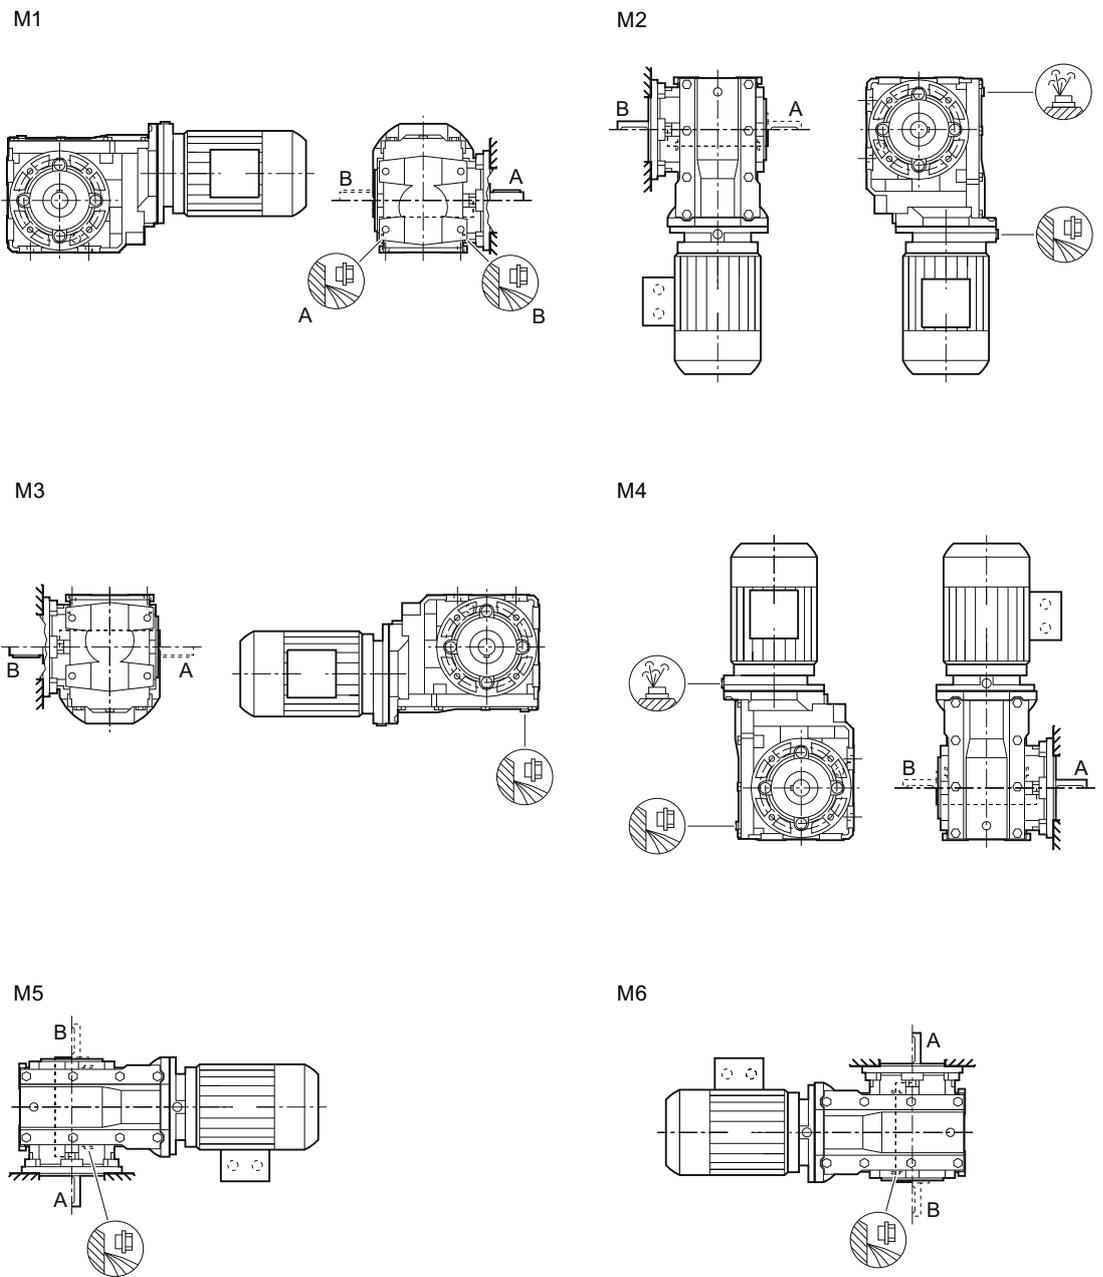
Mounting position for bevel gearbox B.Z housing flange design and B.F flange design, size 29
